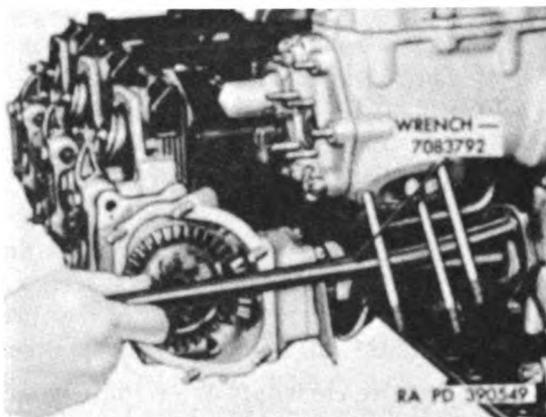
Removing or installing camshaft drive housing inner packing nut.
